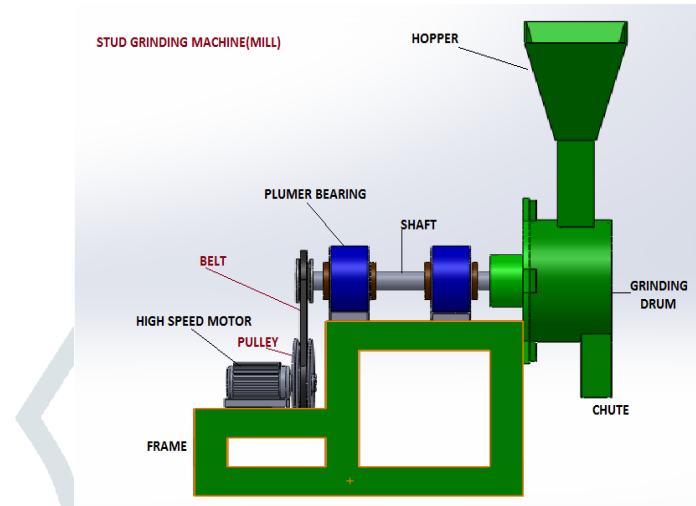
VIEW OF THE STUD GRINDING MACHINE SHOWING COMPONENTS
